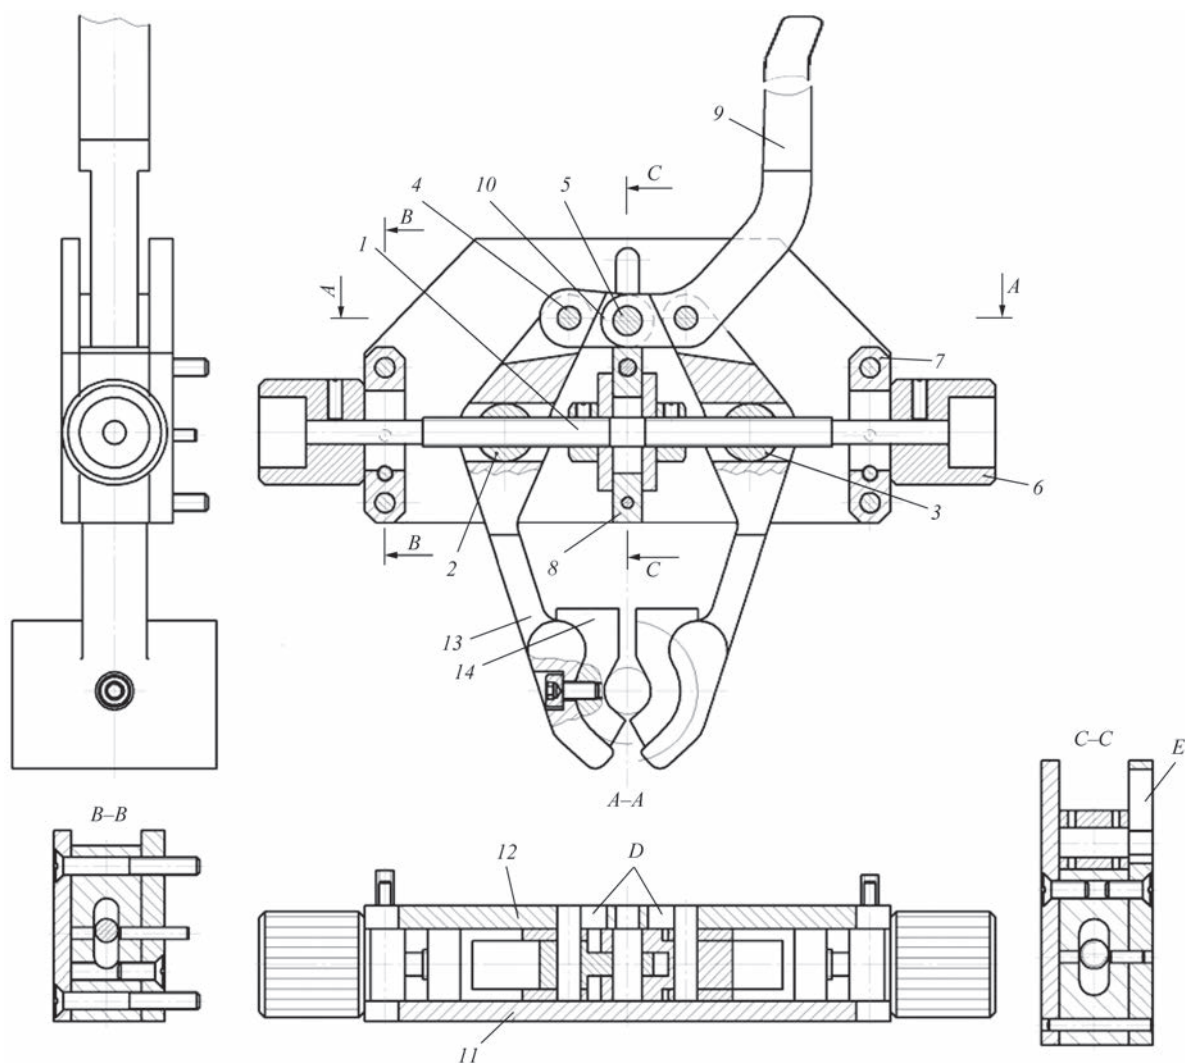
General view of clamping mechanism in all models of welding heads (designations see in the text) designed at the Scientific and Engineering Center of welding and control in the field of nuclear energy
